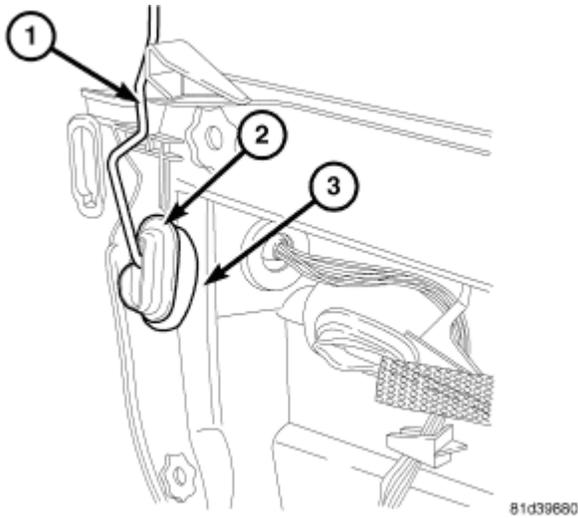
Inside Lock Rod, Grommet & Carrier Plate
